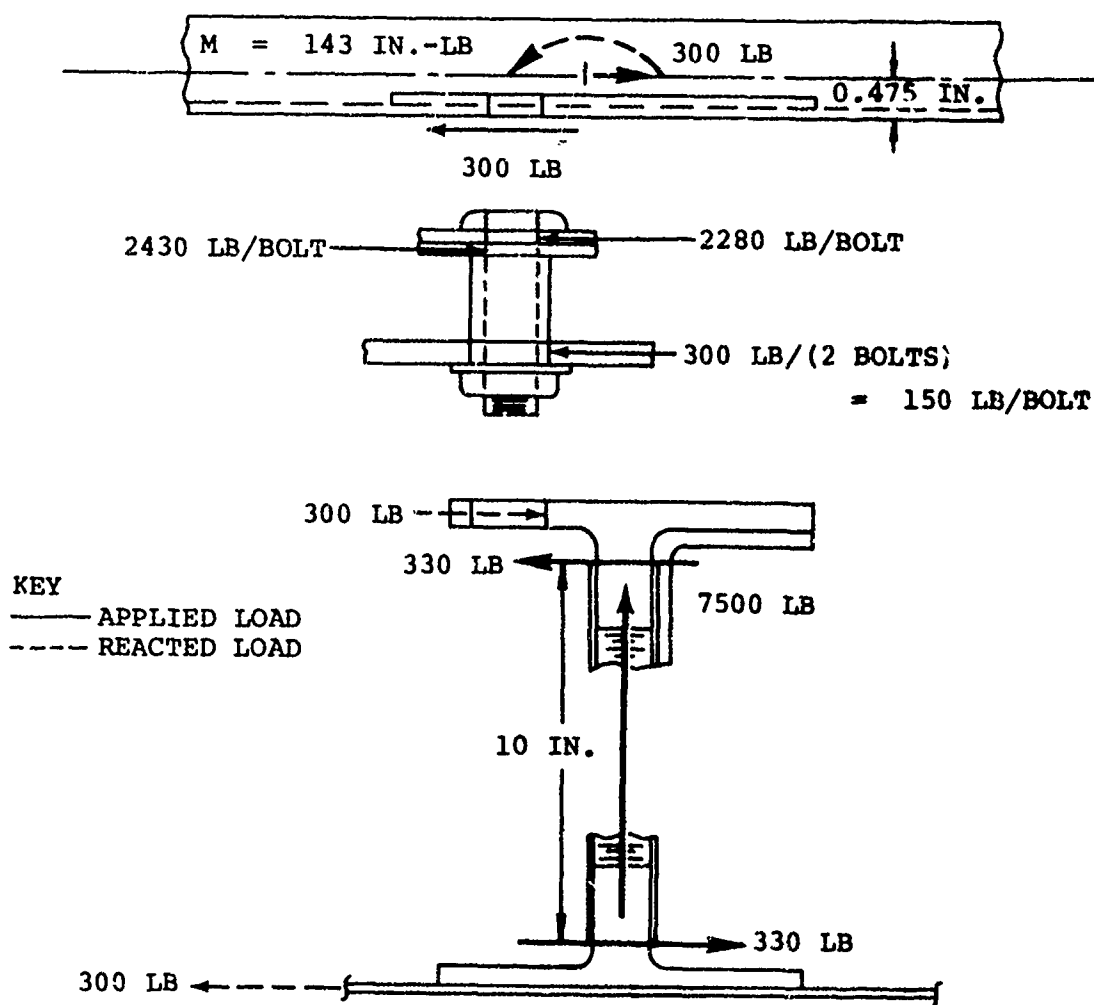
Supporting Structure Loads, Isolated Floor Rail Fully Extended Above Floor Frame, Free Body Diagrams of Structure and Loads.
